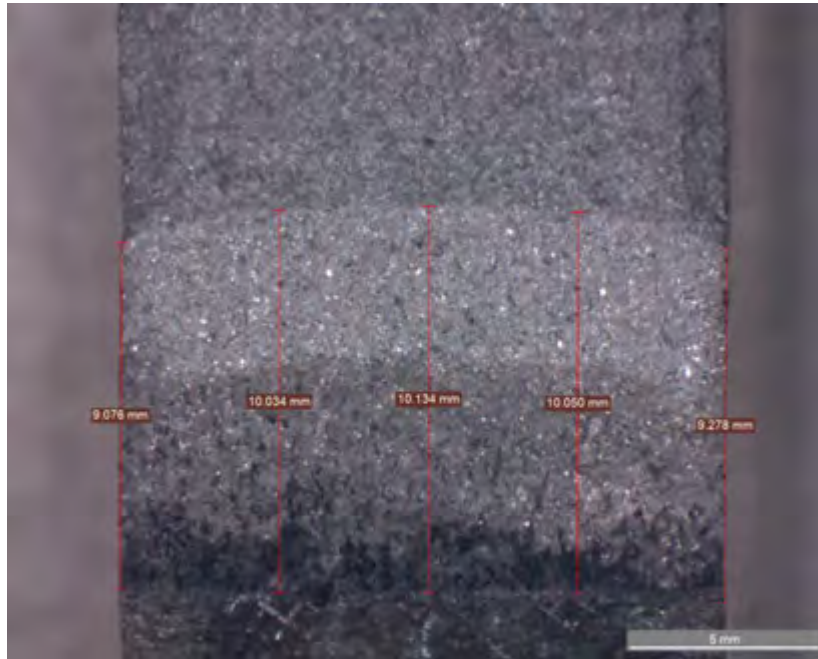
Crack length measurement of fracture surface of specimen EDGE – 1.
